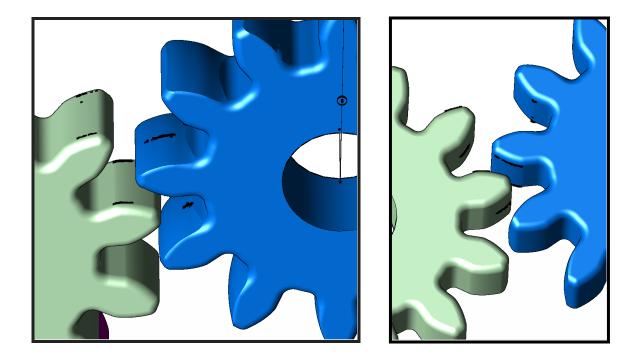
Multiple tooth contact points Fi" runs using the 3DCS Axial Backlash with added flank test. The green Nominal Gear is rotated CW with the Blue Toleranced Gear in constant pressurized contact. The crowned gear in the drive direction has the contact centered, while the reverse direction uncrowned contacts are split toward the edges.
